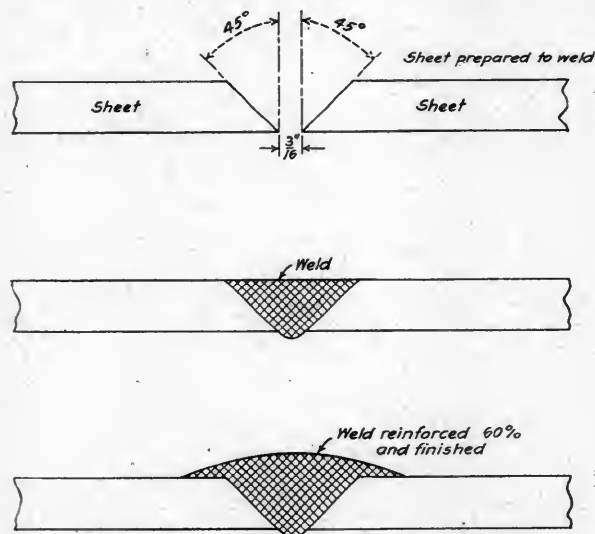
Method of Welding Boiler Sheets by Electric Process
